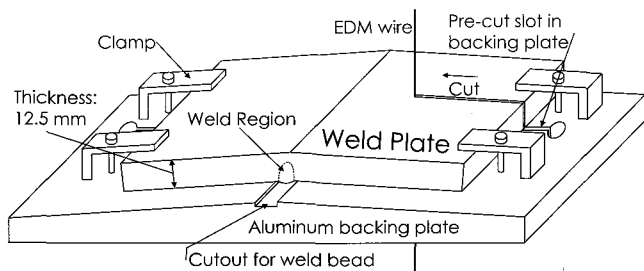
Weld specimen and clamping arrangement for cutting by WEDM
